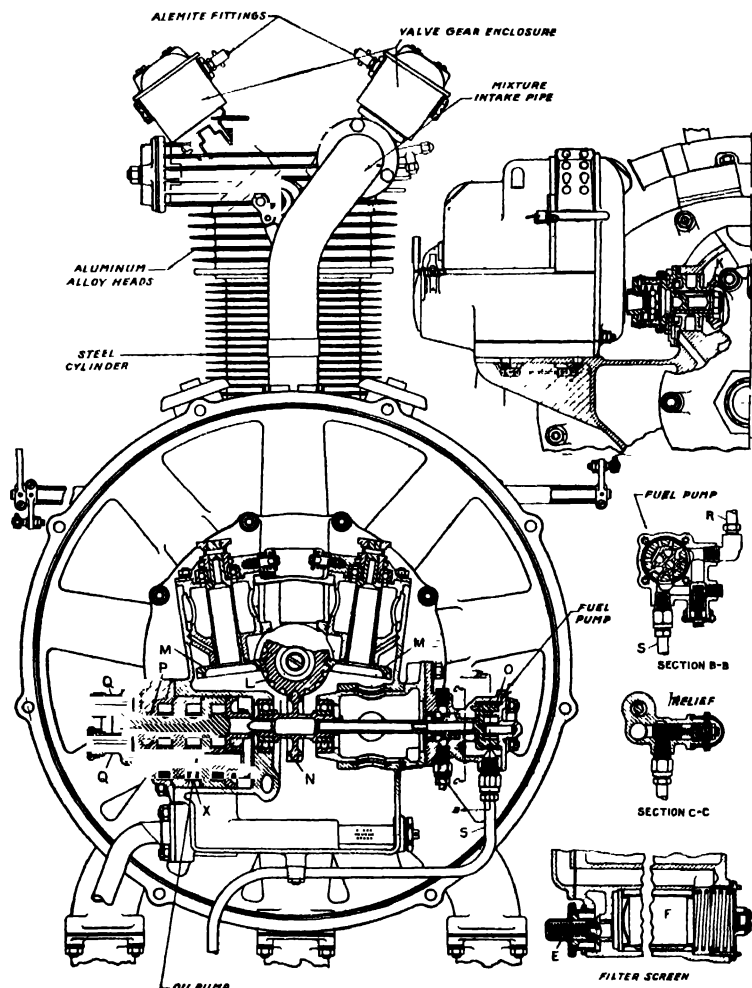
View of Accessory Drive of Wright "Whirlwind" Engine, also Location of Oil and Fuel Pumps.
